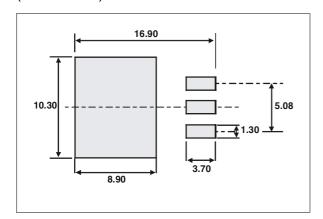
D²PAK Foot Print Dimensions (in millimeters)
